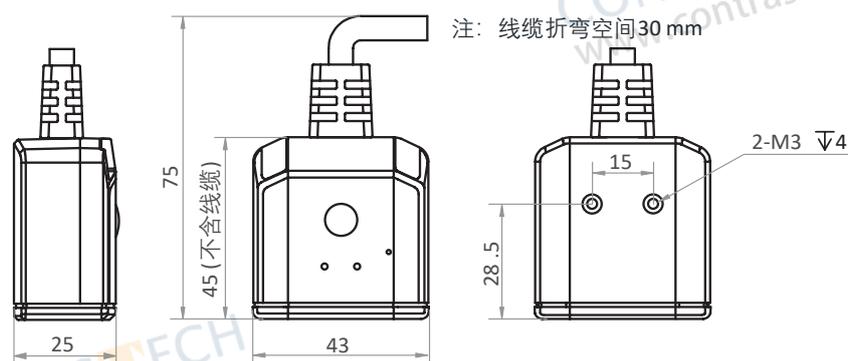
Mechanical Dimensions (in mm) of the fixed focus buzzer-type code reader with 46 * 43 * 25 mm.(Focus cannot be adjusted,Only this device supports the buzzer function and requires Buzzer Enable to be enabled).
